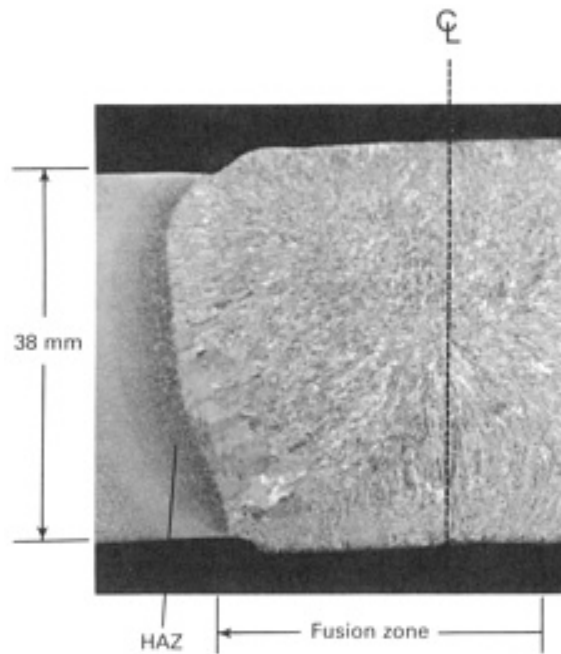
MACROGRAPH SHOWING FUSION ZONE AND HEAT-AFFECTED ZONE IN AN ELECTROSLAG WELDMENT
